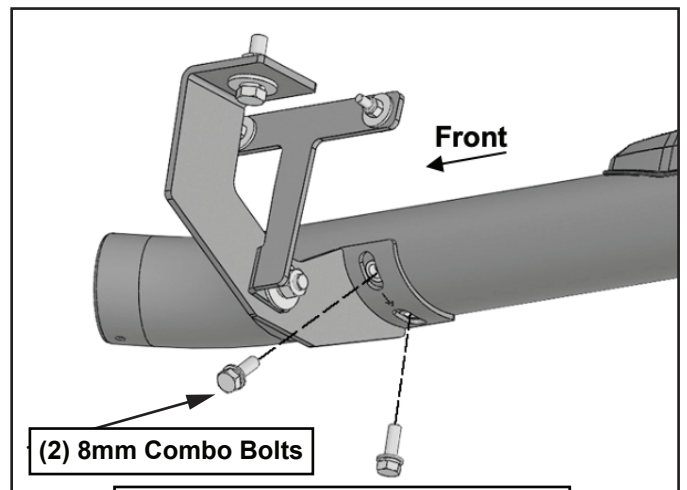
Passenger/Right rear mounting location (Model with threaded inset shown)
